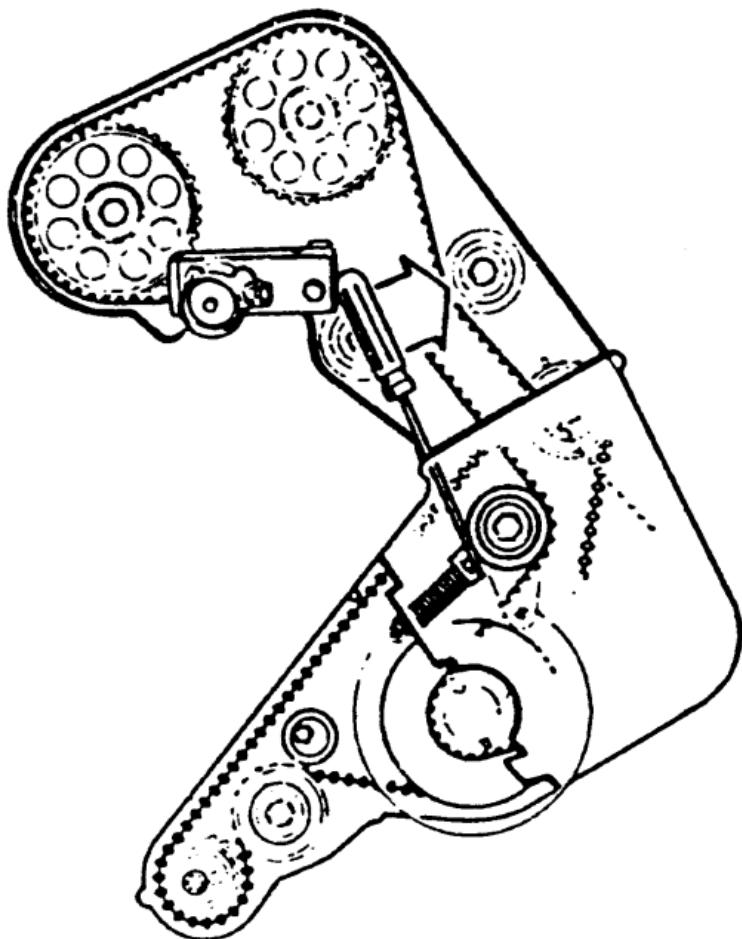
Adjusting the timing belt-B234F engine
